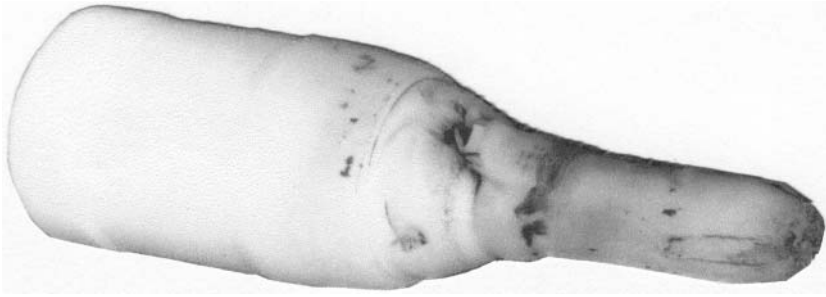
The front part of an extruded 100mm caliber piston. Some cracks are visible at the rear part of the cylindrically extruded piston
